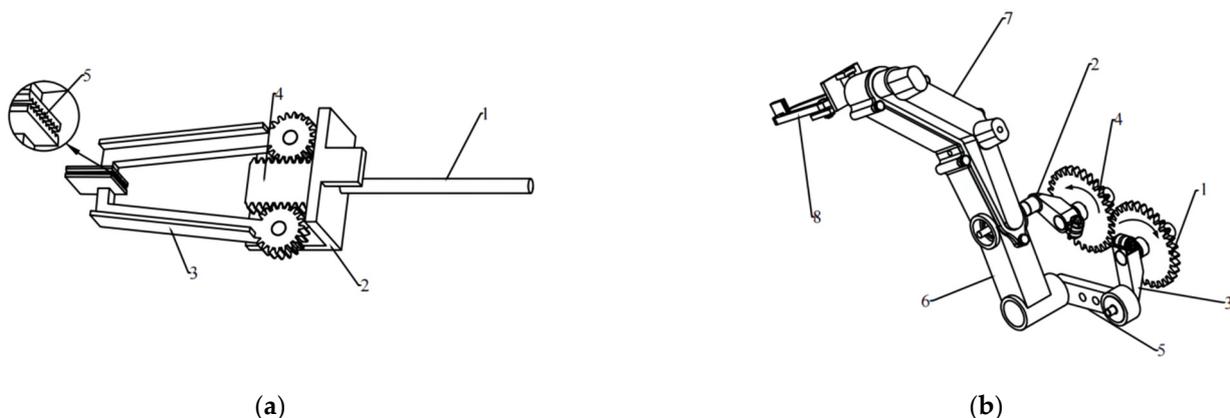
The automatic transplanting mechanism. (a) Flexible clamping mechanism. 1—Push rod; 2—rack mounting plate; 3—gripper; 4—rack; 5—wavy inner side. (b) Double-crank linkage mechanism. 1, 4—spur gear; 2, 3—crank; 5, 6, 7—connecting rod; 8—clamping mechanism.
